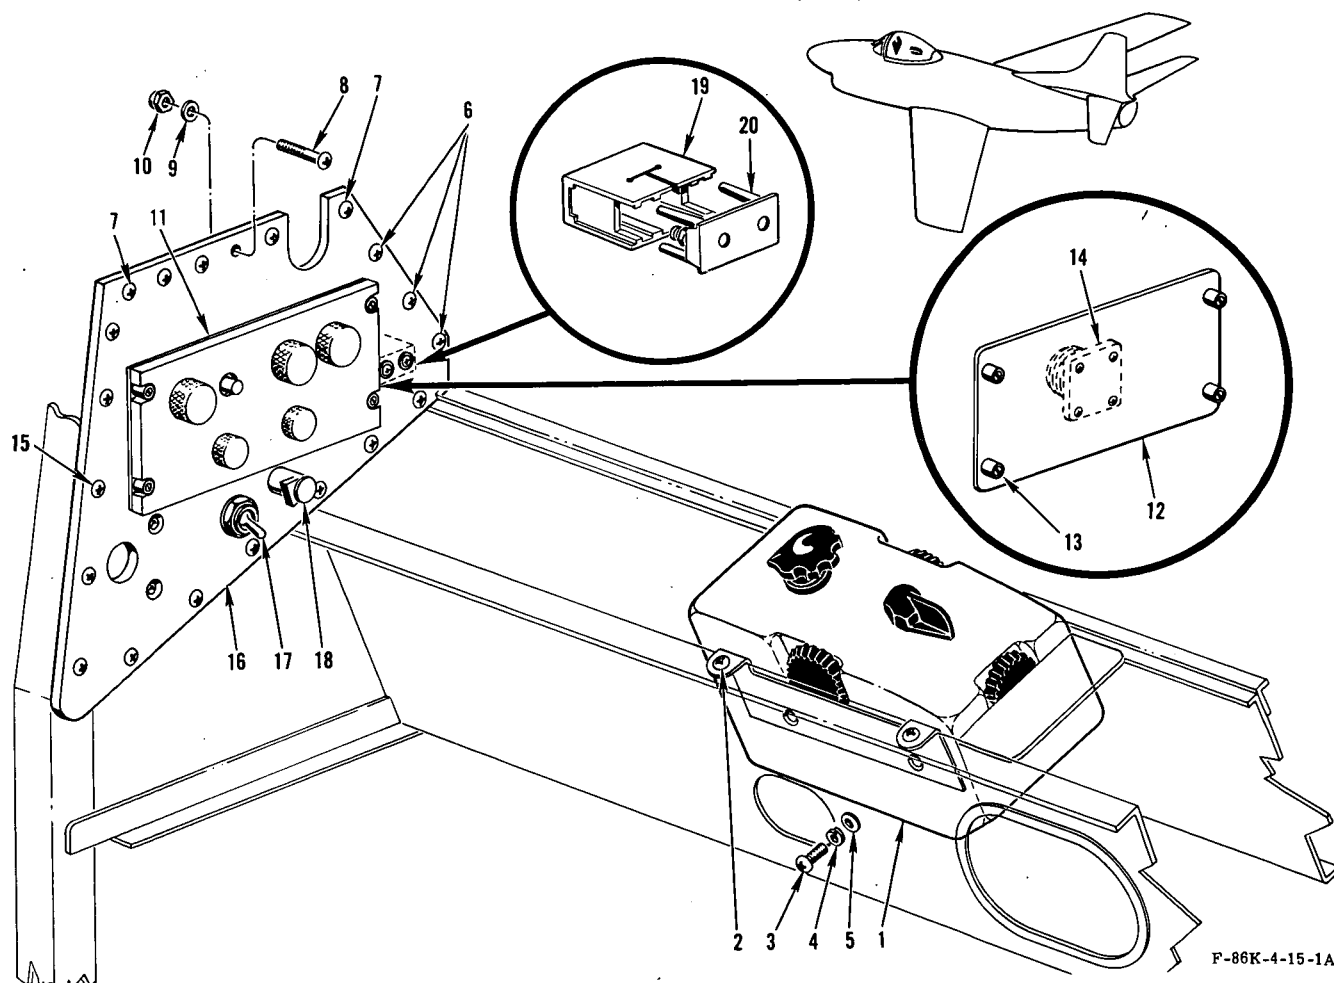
RH CONSOLE PANEL INSTRUMENT EQUIPMENT INSTALLATION
